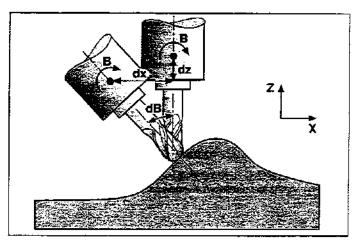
Offset of the tool datum for tilting the tool
